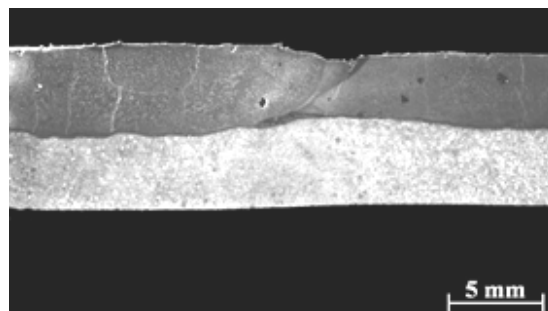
Macrostructure of the high-chromium cast iron-surfaced layer – visible cracks and gas pores [2]
